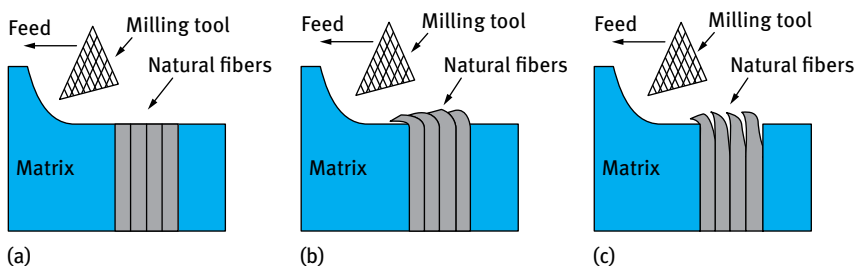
Principal mechanisms when cutting NFRPs; (a) ideal shearing of fibers, (b) real shearing of fibers, (c) real shearing of fibers showing interfaces break [46].
